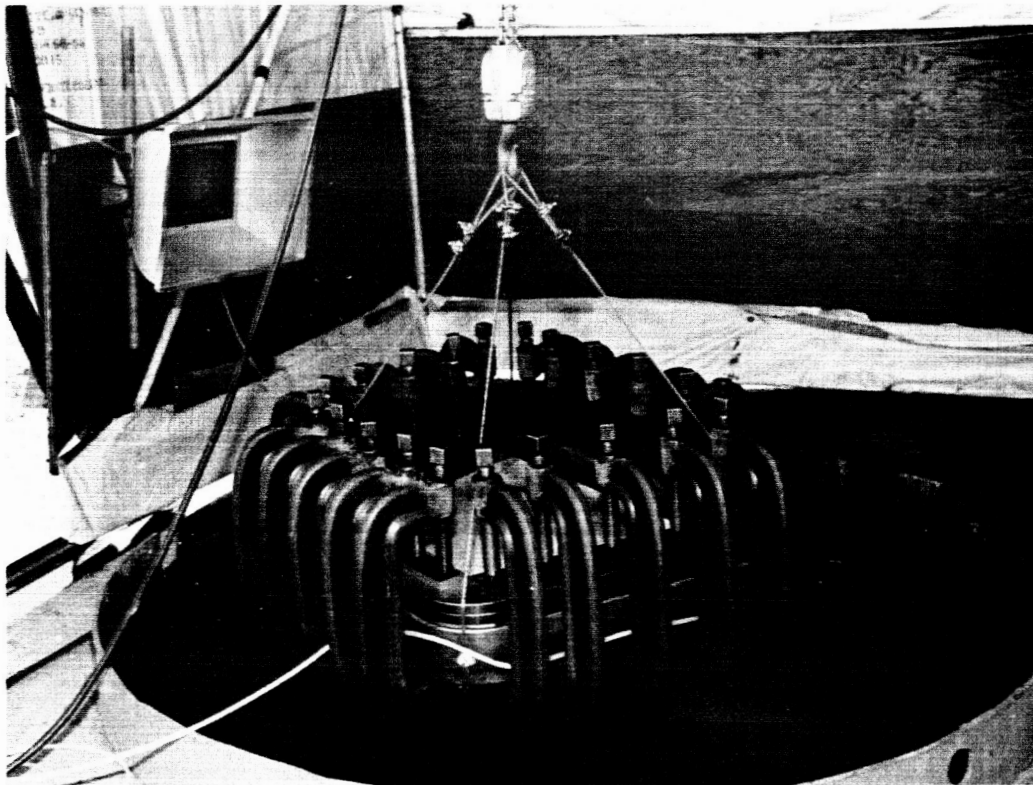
Die Assembly Emerging from 7-ft-Diameter Forming Pool
